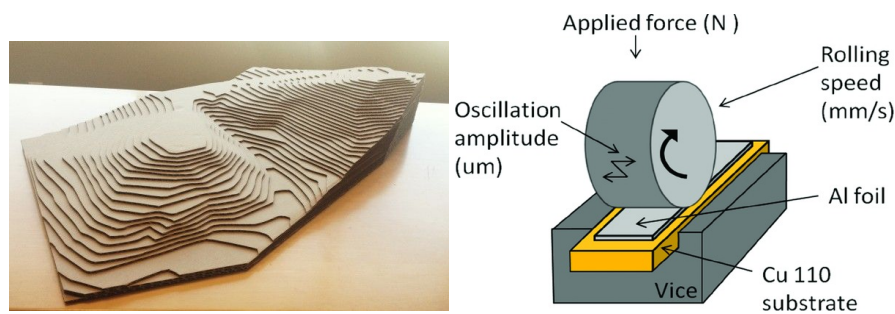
Cardboard sheet lamination and the ultrasonic welding method[11] [12]
